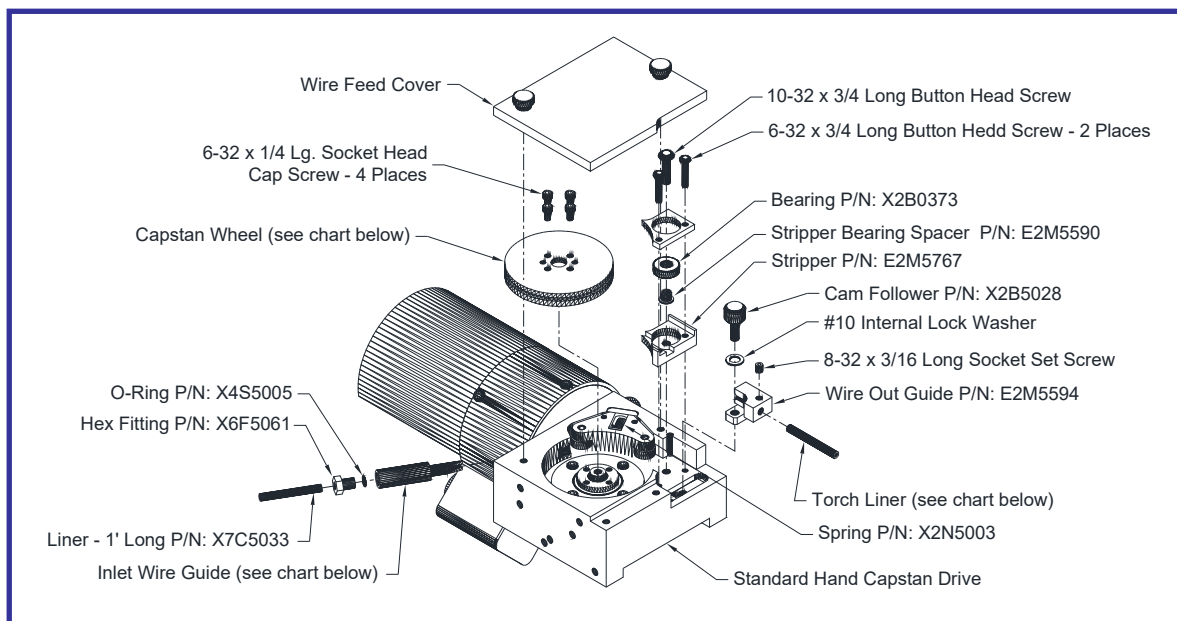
0.062" Aluminum Wire Component Parts for Standard Hand Capstan Drive
